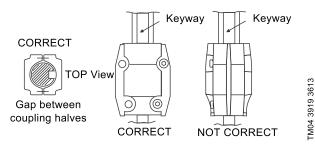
Coupling adjustment all CR, CRI, CRN, CRT
